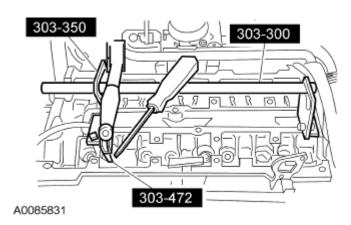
Inserting Valve Spring And Valve Spring Retainer Courtesy of FORD MOTOR CO.
